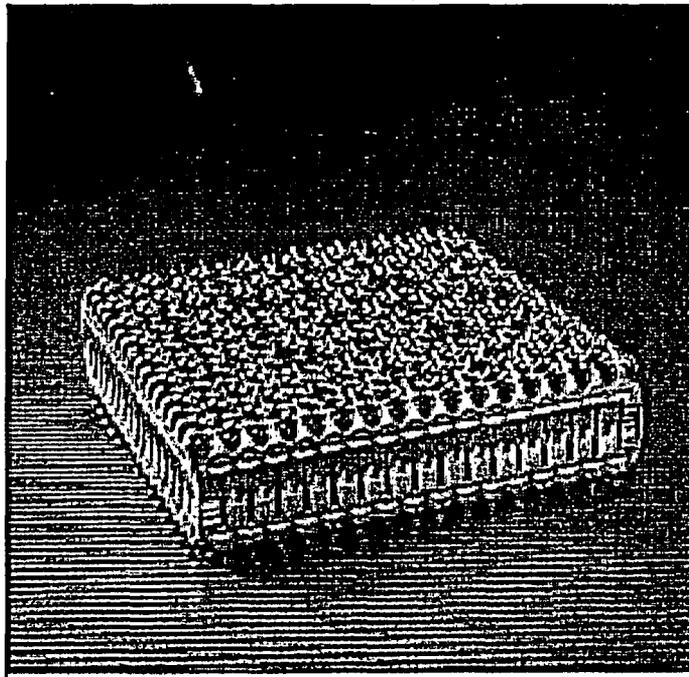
Intermediate-Vaned Spacer Grid Assembly
